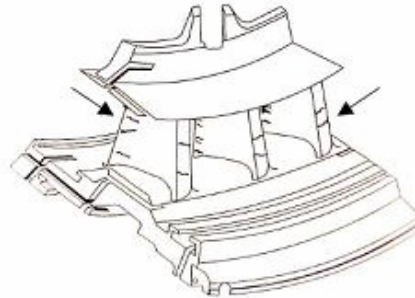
Typical view from the concave side, showing leading, trailing and shroud/buttress cracking on the Alstom Tornado 2nd stage stator segment.
